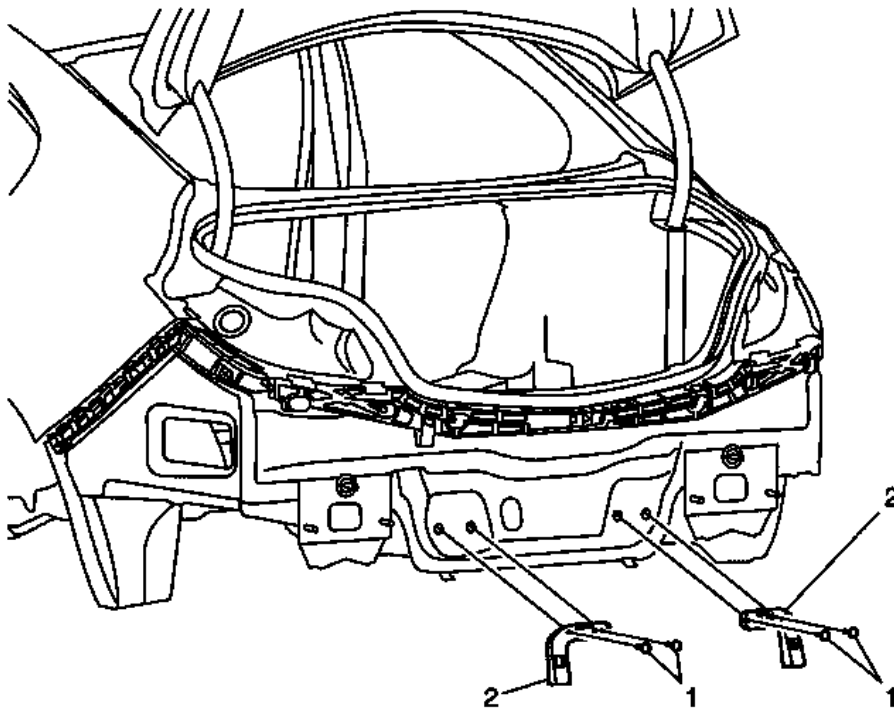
Rear Bumper Fascia Lower Brackets & Rivets
